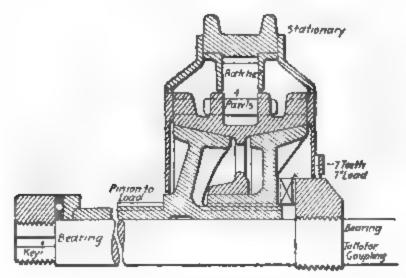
, -- Cone Brake "Naval" Boat Crane Full Load Torque = 7880 In-Lbs.
